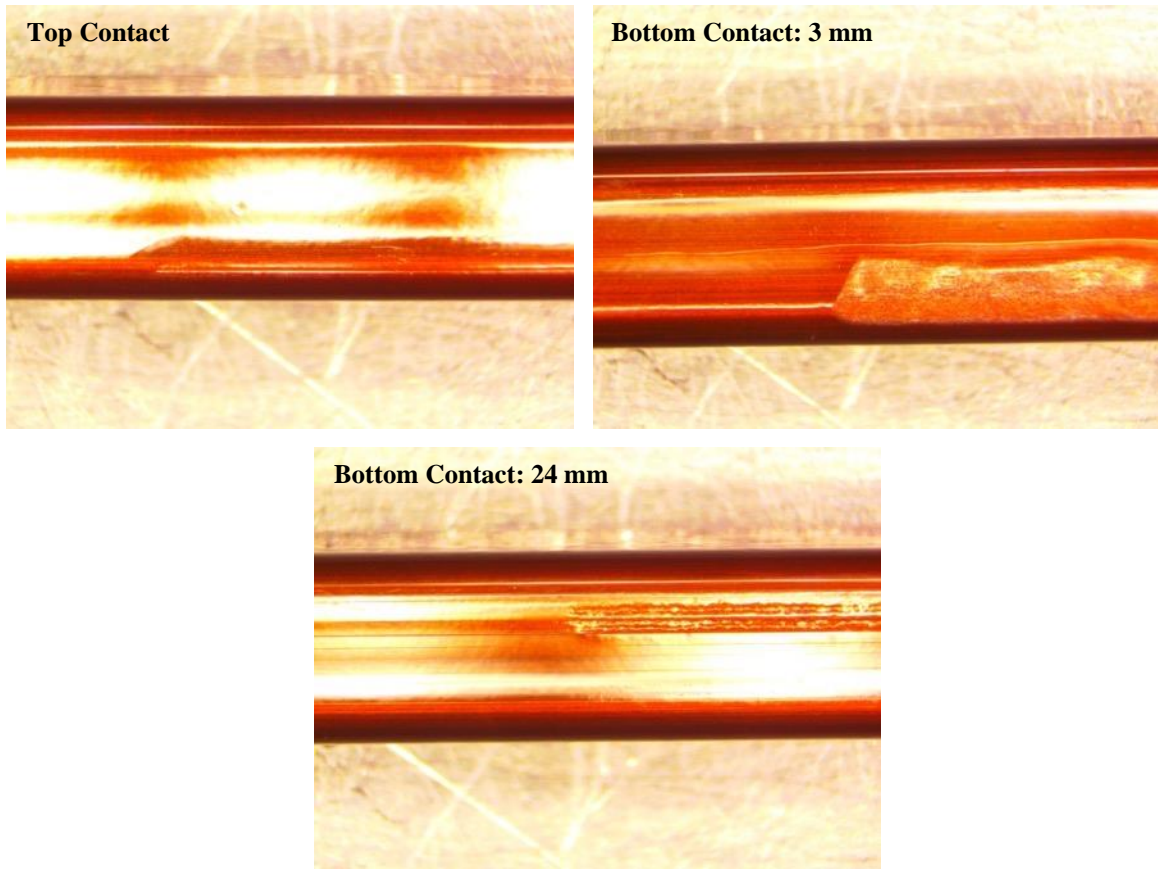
Representative top and bottom surface contact for copper wire tested at both 22 and 42 lbs with both support rollers.
